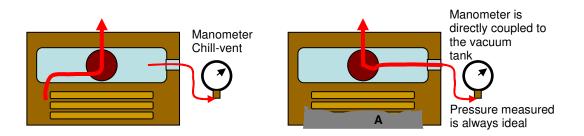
Pressure measurement for a chill vent. The gap towards the aspiration hole is open (left) and closed by solidified aluminium A (right)
